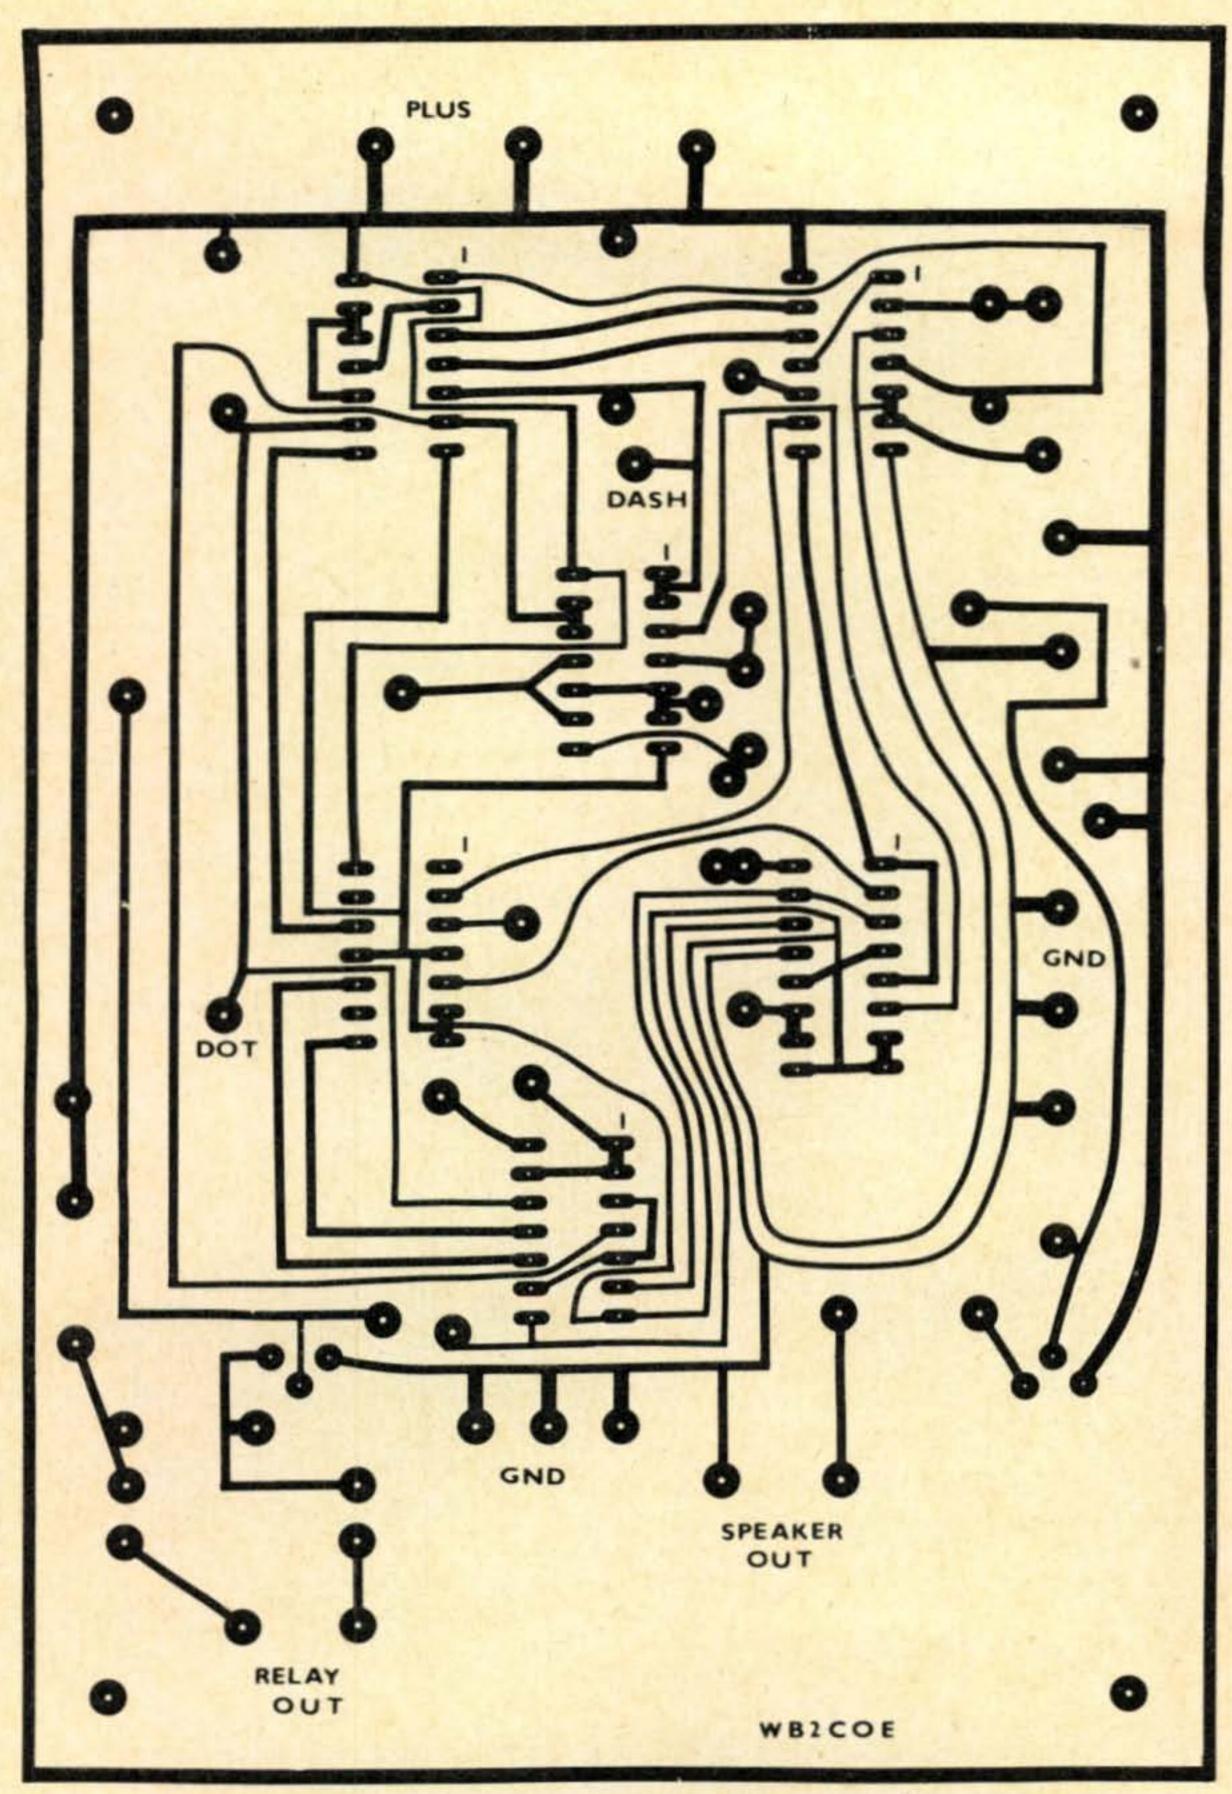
A—Full-size P-C board foil layout for the Version II COSMOS.
